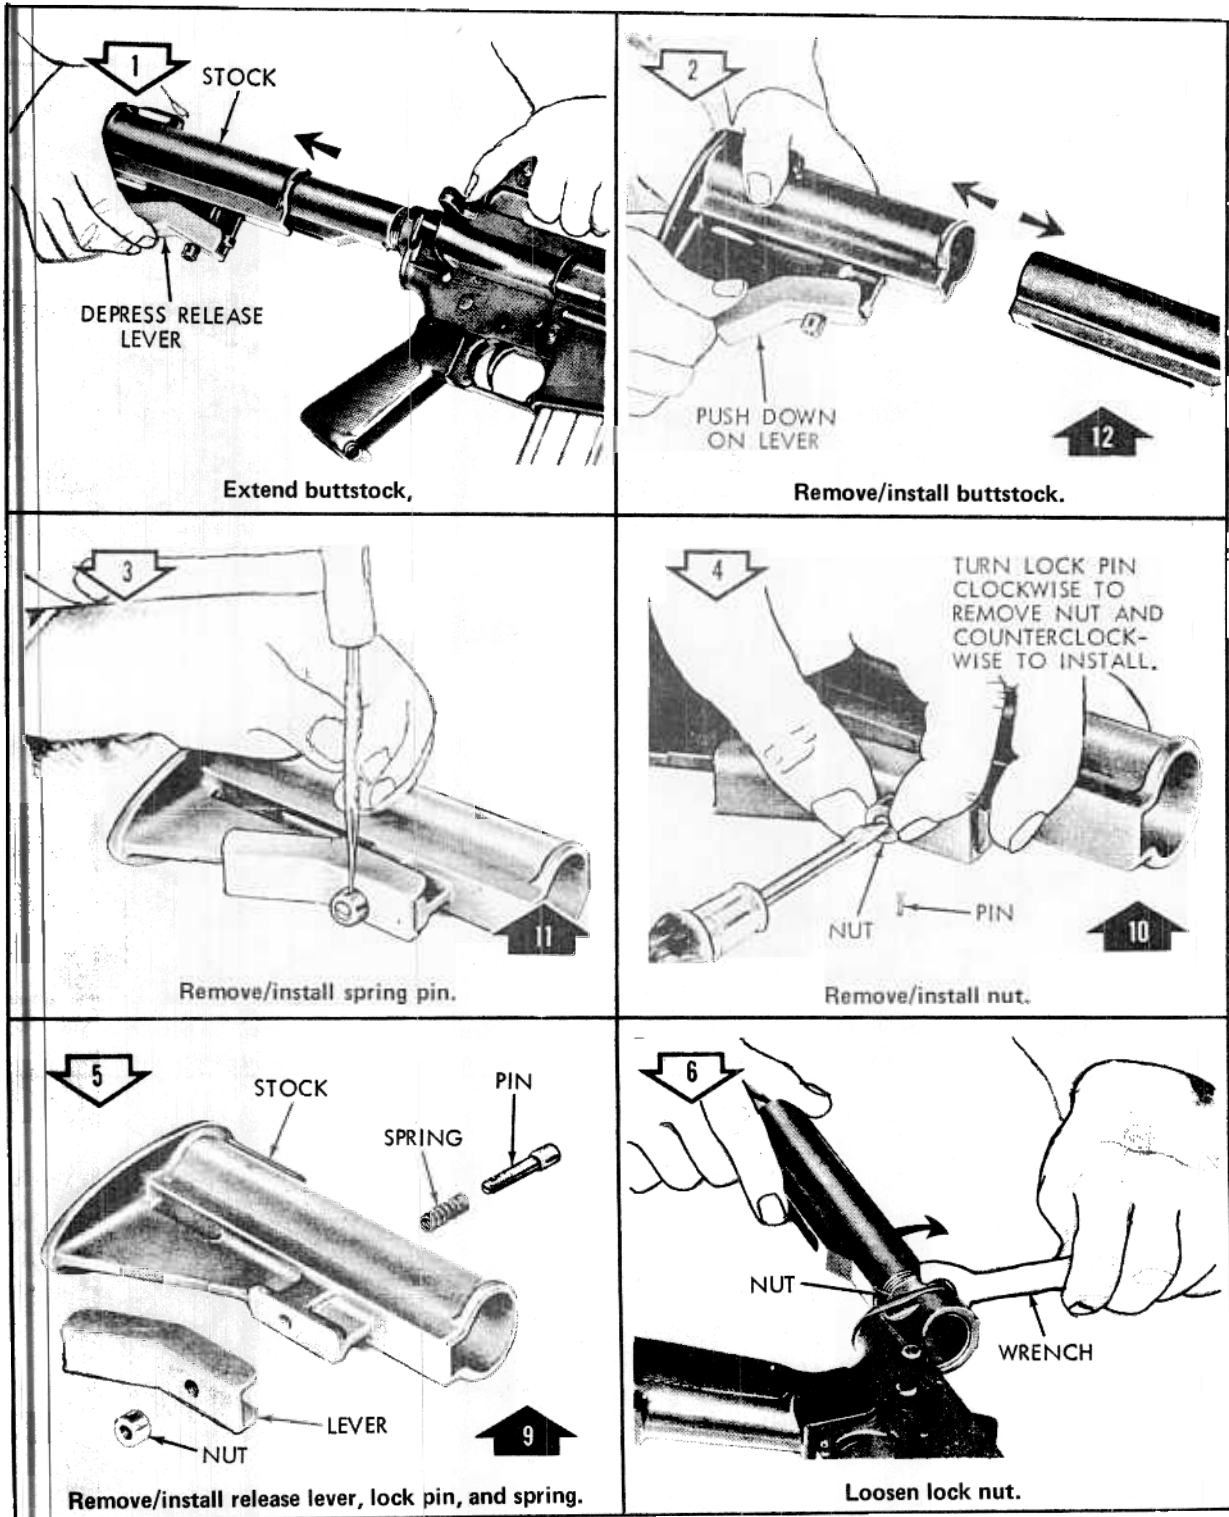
Disassembly/Assembly of the Commando Submachine Gun.
